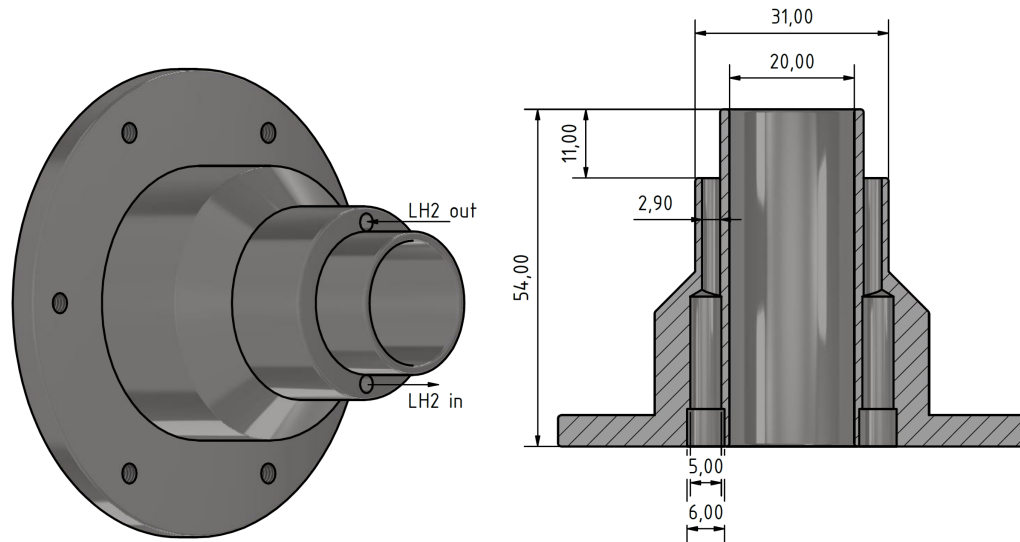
Drawing of the target holder. Left: Full view. Right: Section view. The dimensions are shown in *mm*. The two channels through the target holder will let the liquid hydrogen in and out of the target cell. The target holder is made out of stainless steel.
